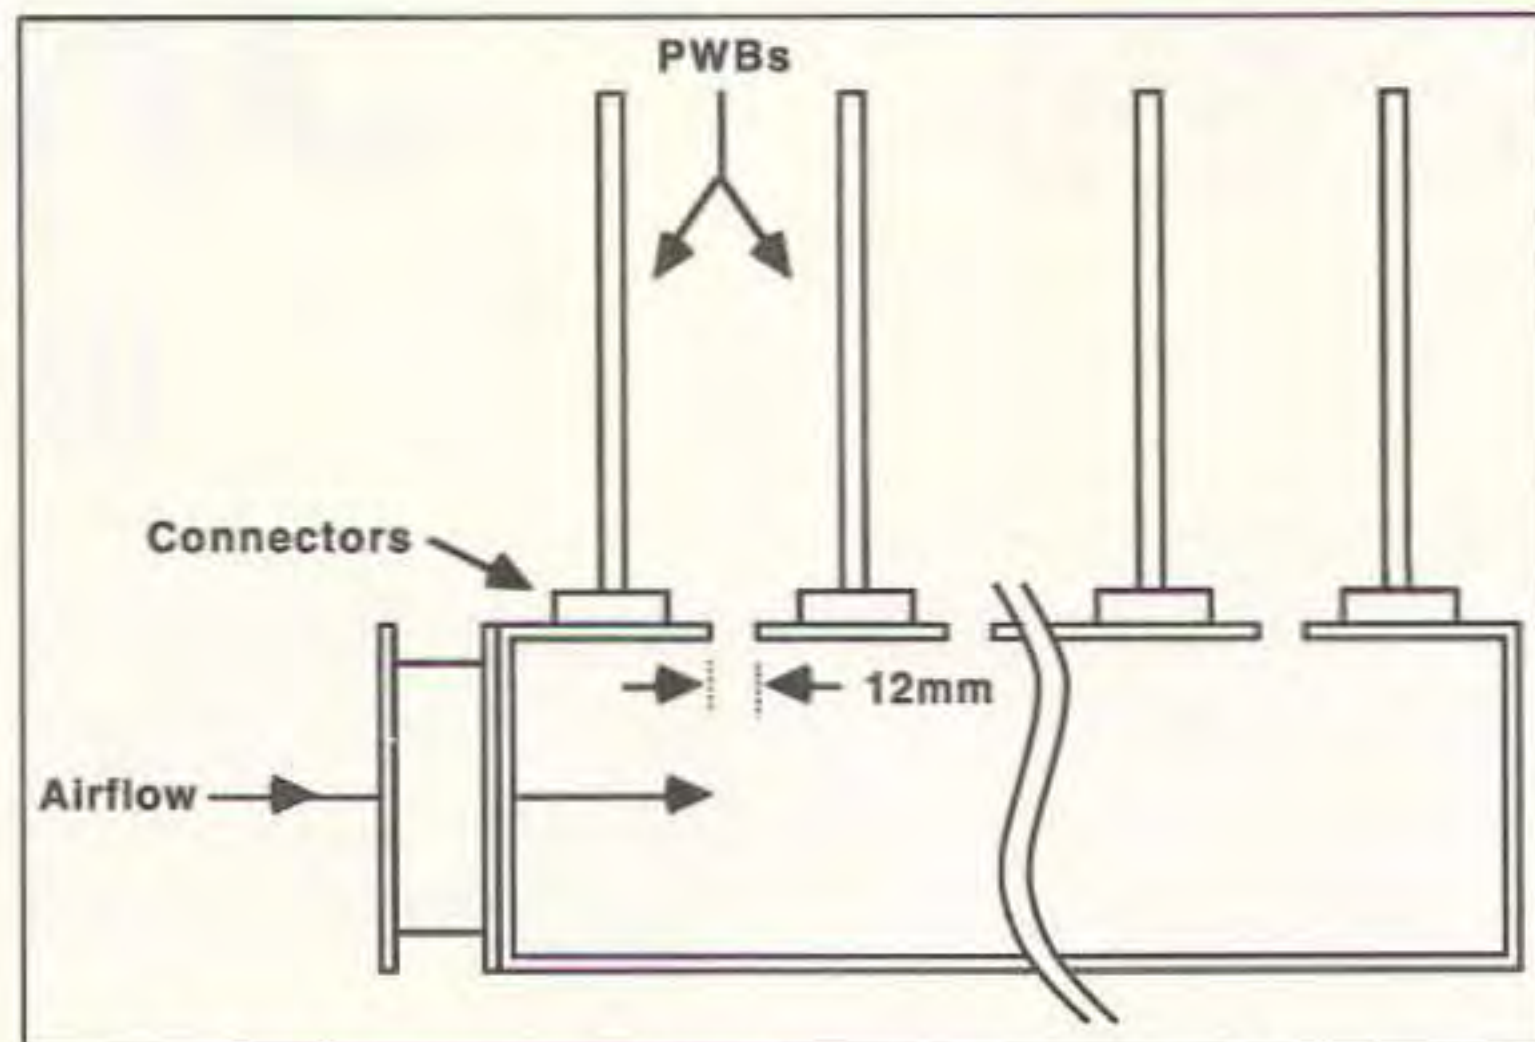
Holes in an otherwise closed chassis were used by one computer manufacturer to direct air over PWB surface.
